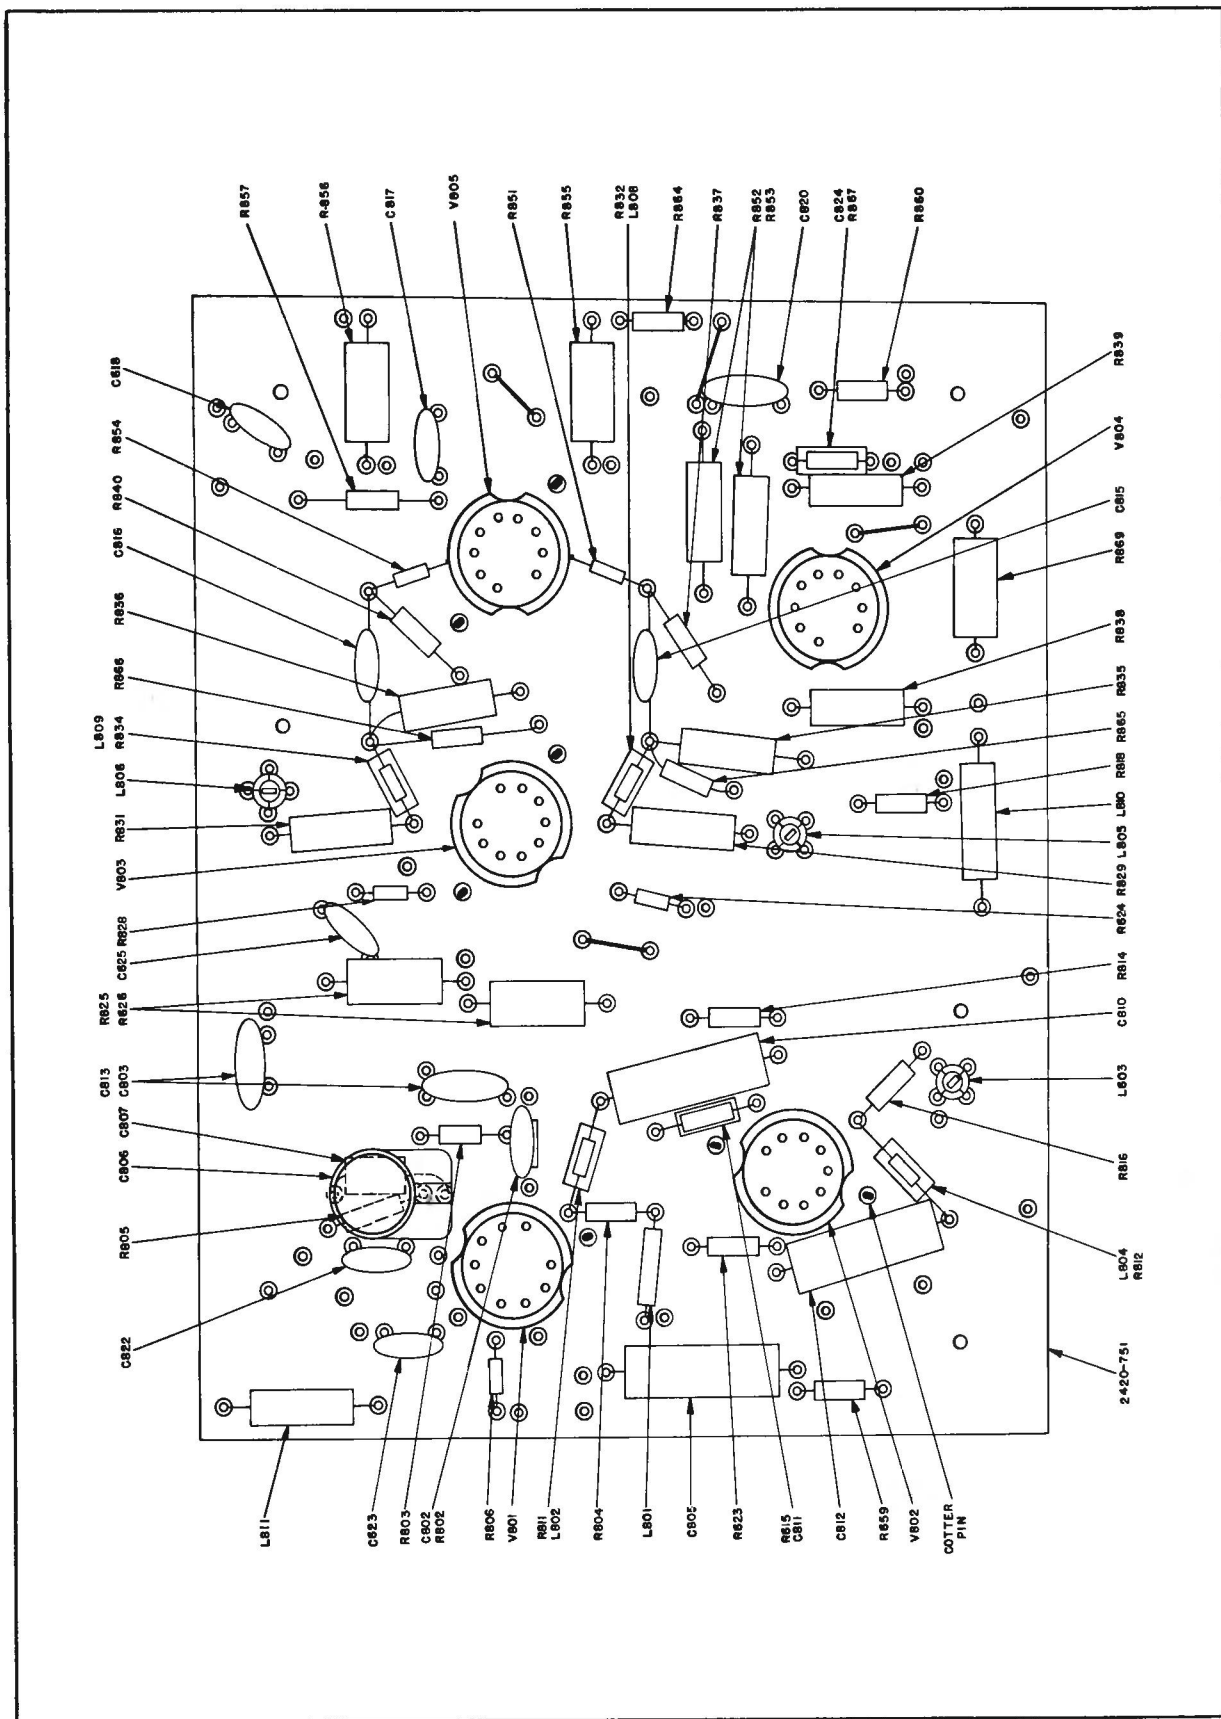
Location of Parts, Circuit Board A801, AM-3568A/USM
